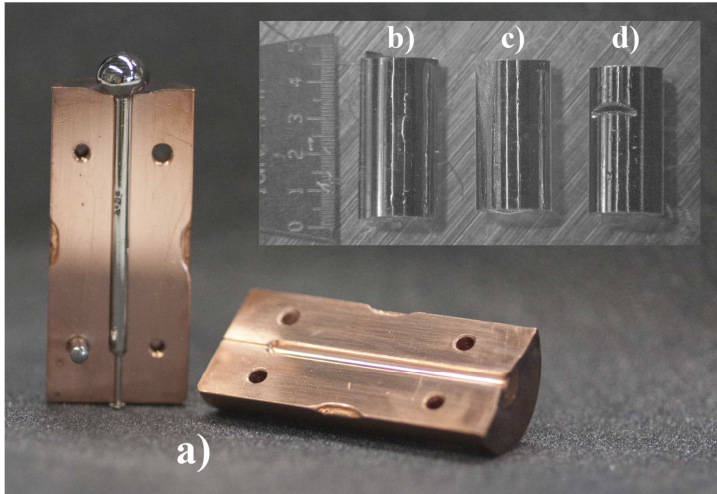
(a) Suction-cast rod of 2 mm diameter in an exchangeable mini-arc mould. Inset: specimen after cutting (b), grinding (c), and notching (d).
